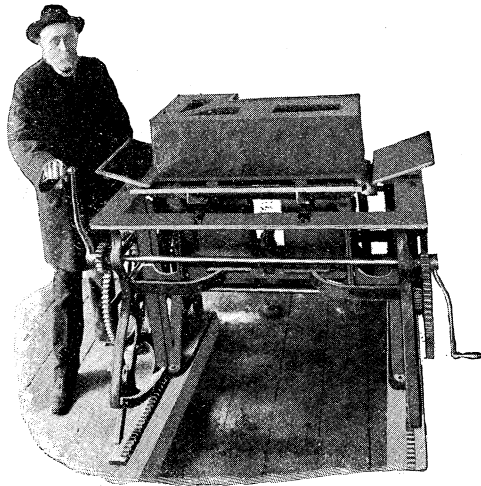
The Winget Concrete Block Machine, Showing Block Ready to be Removed.
